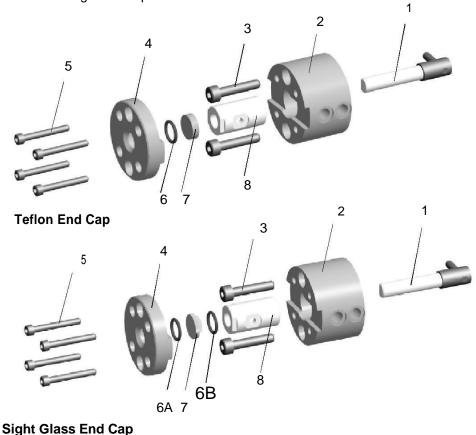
Micro SR Pump Module Components Assembly/Disassembly
